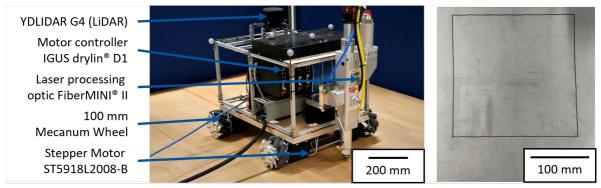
left: prototype of a mobile robot system for laser materials processing incl. laser optics and sensors, right: result of an example process performed by the mobile robot system.
